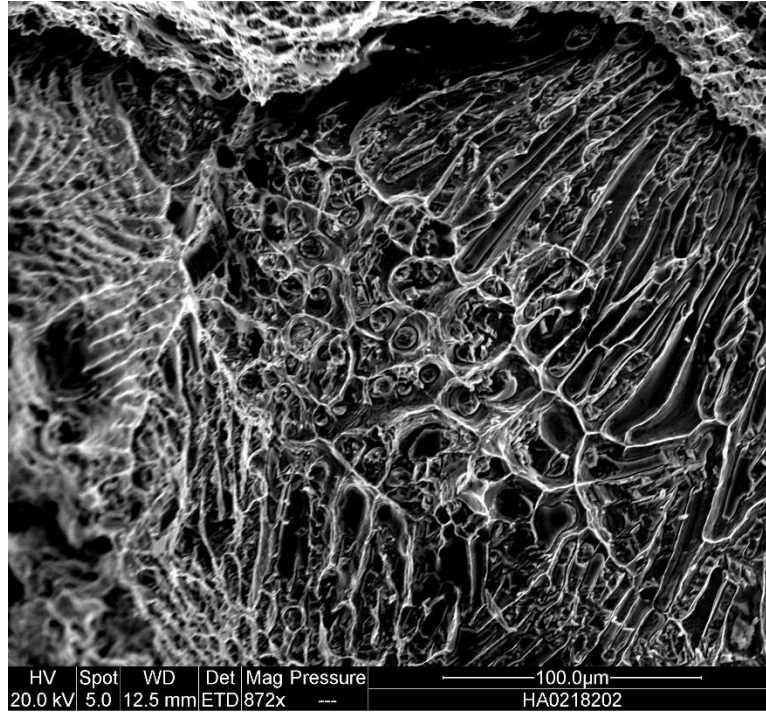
SEM image of sintered 0.3 mm layer height Cu-PLA tensile fracture
